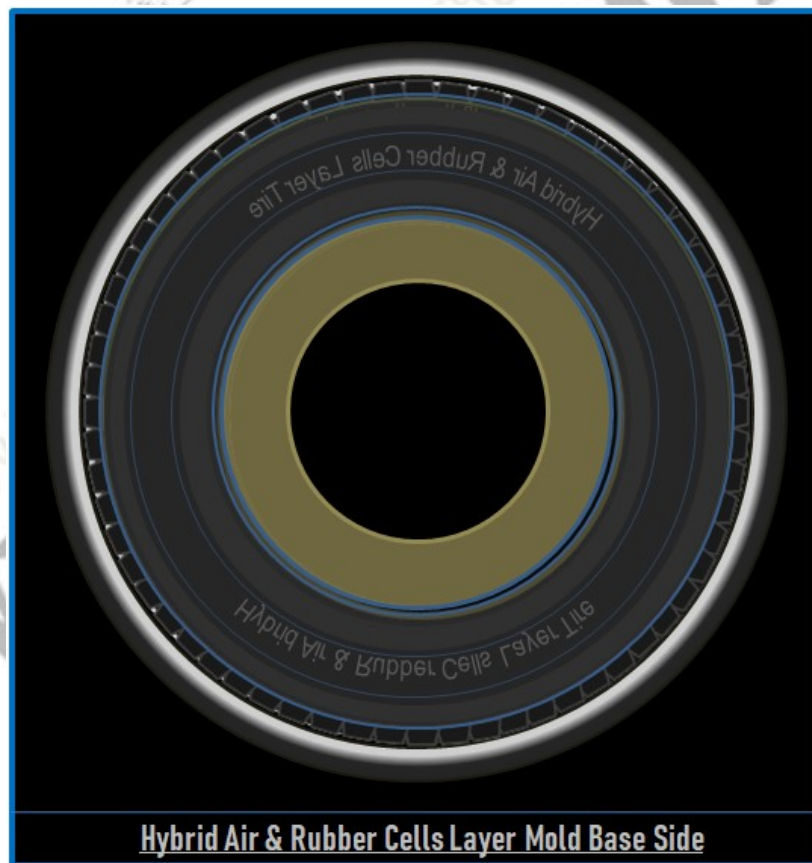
Hybrid Air & Rubber Cells Layer Tire Base Mold Sample
